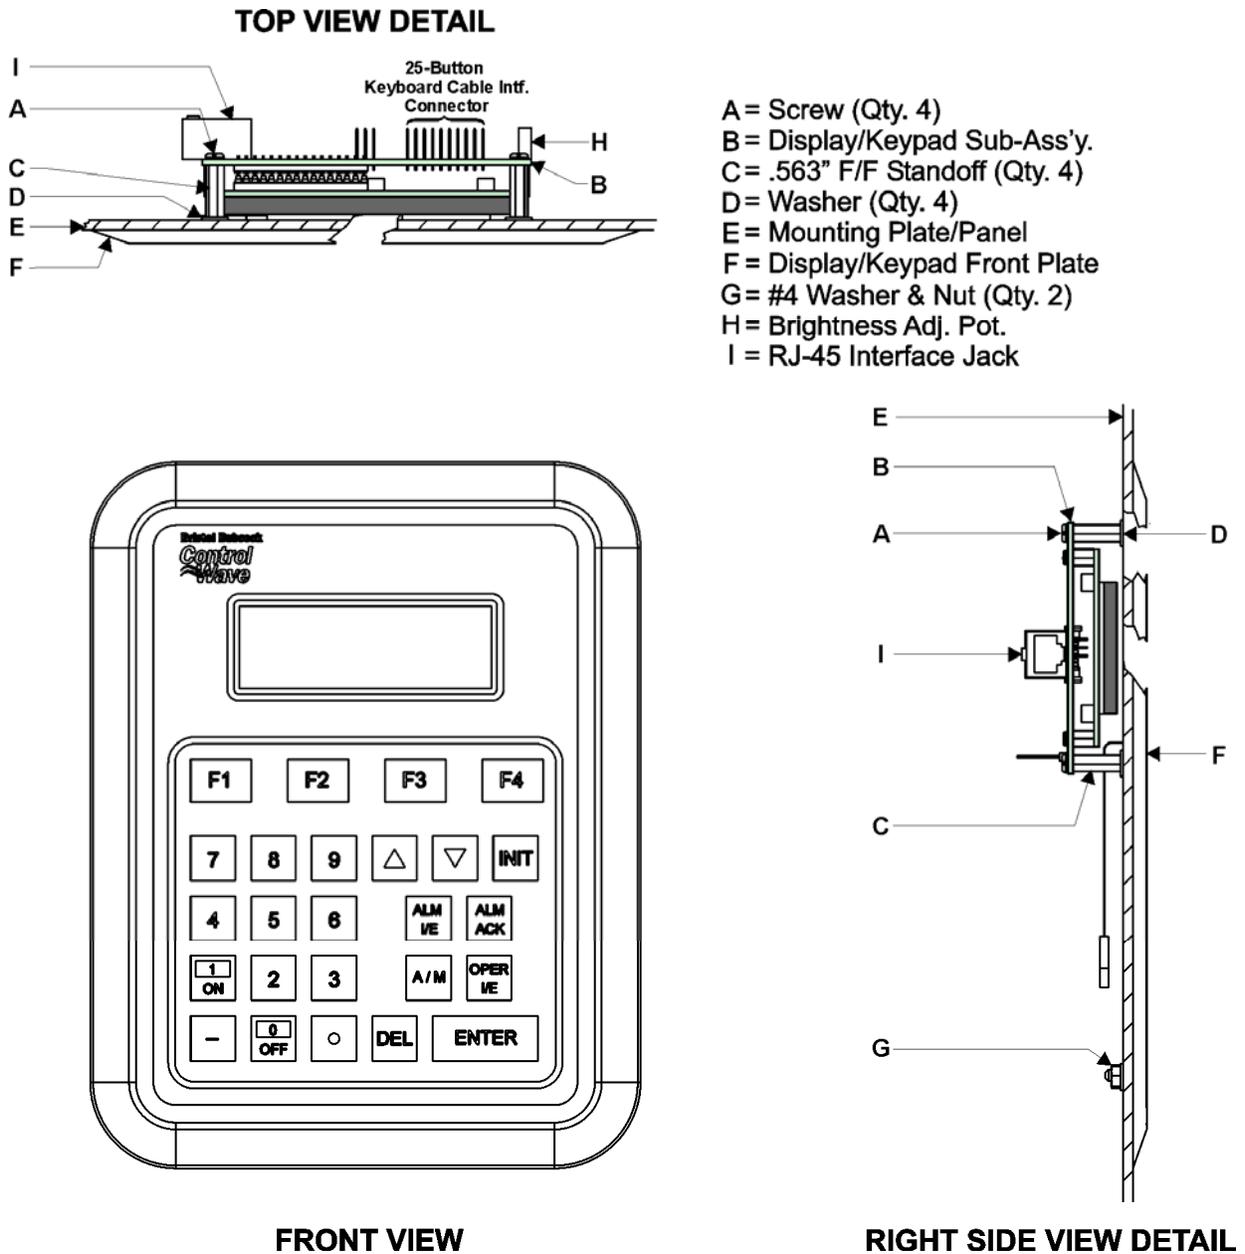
25-Button Display/Keypad Assembly Installation Drawing
